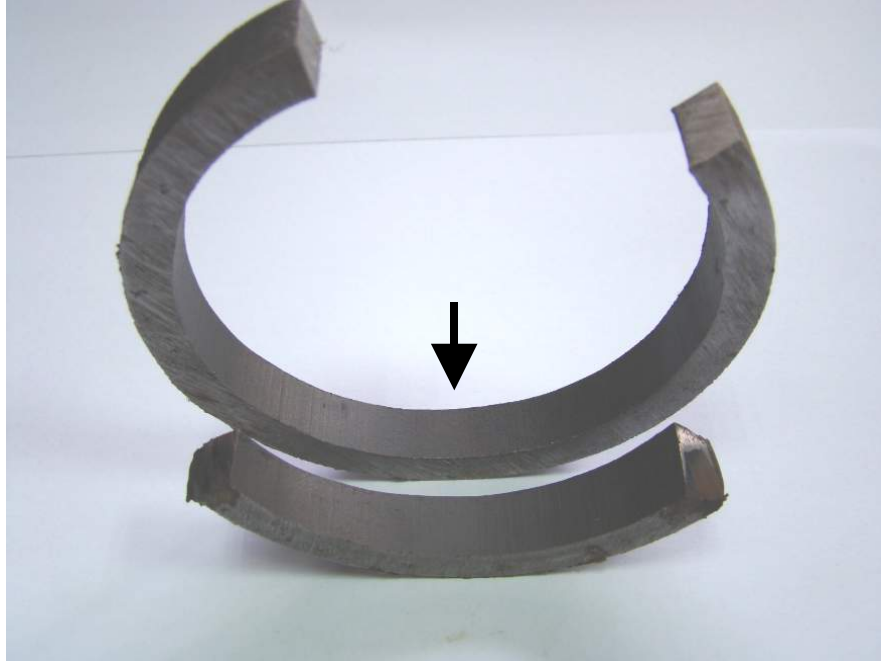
Photograph showing the internal surfaces of seamless tube.
